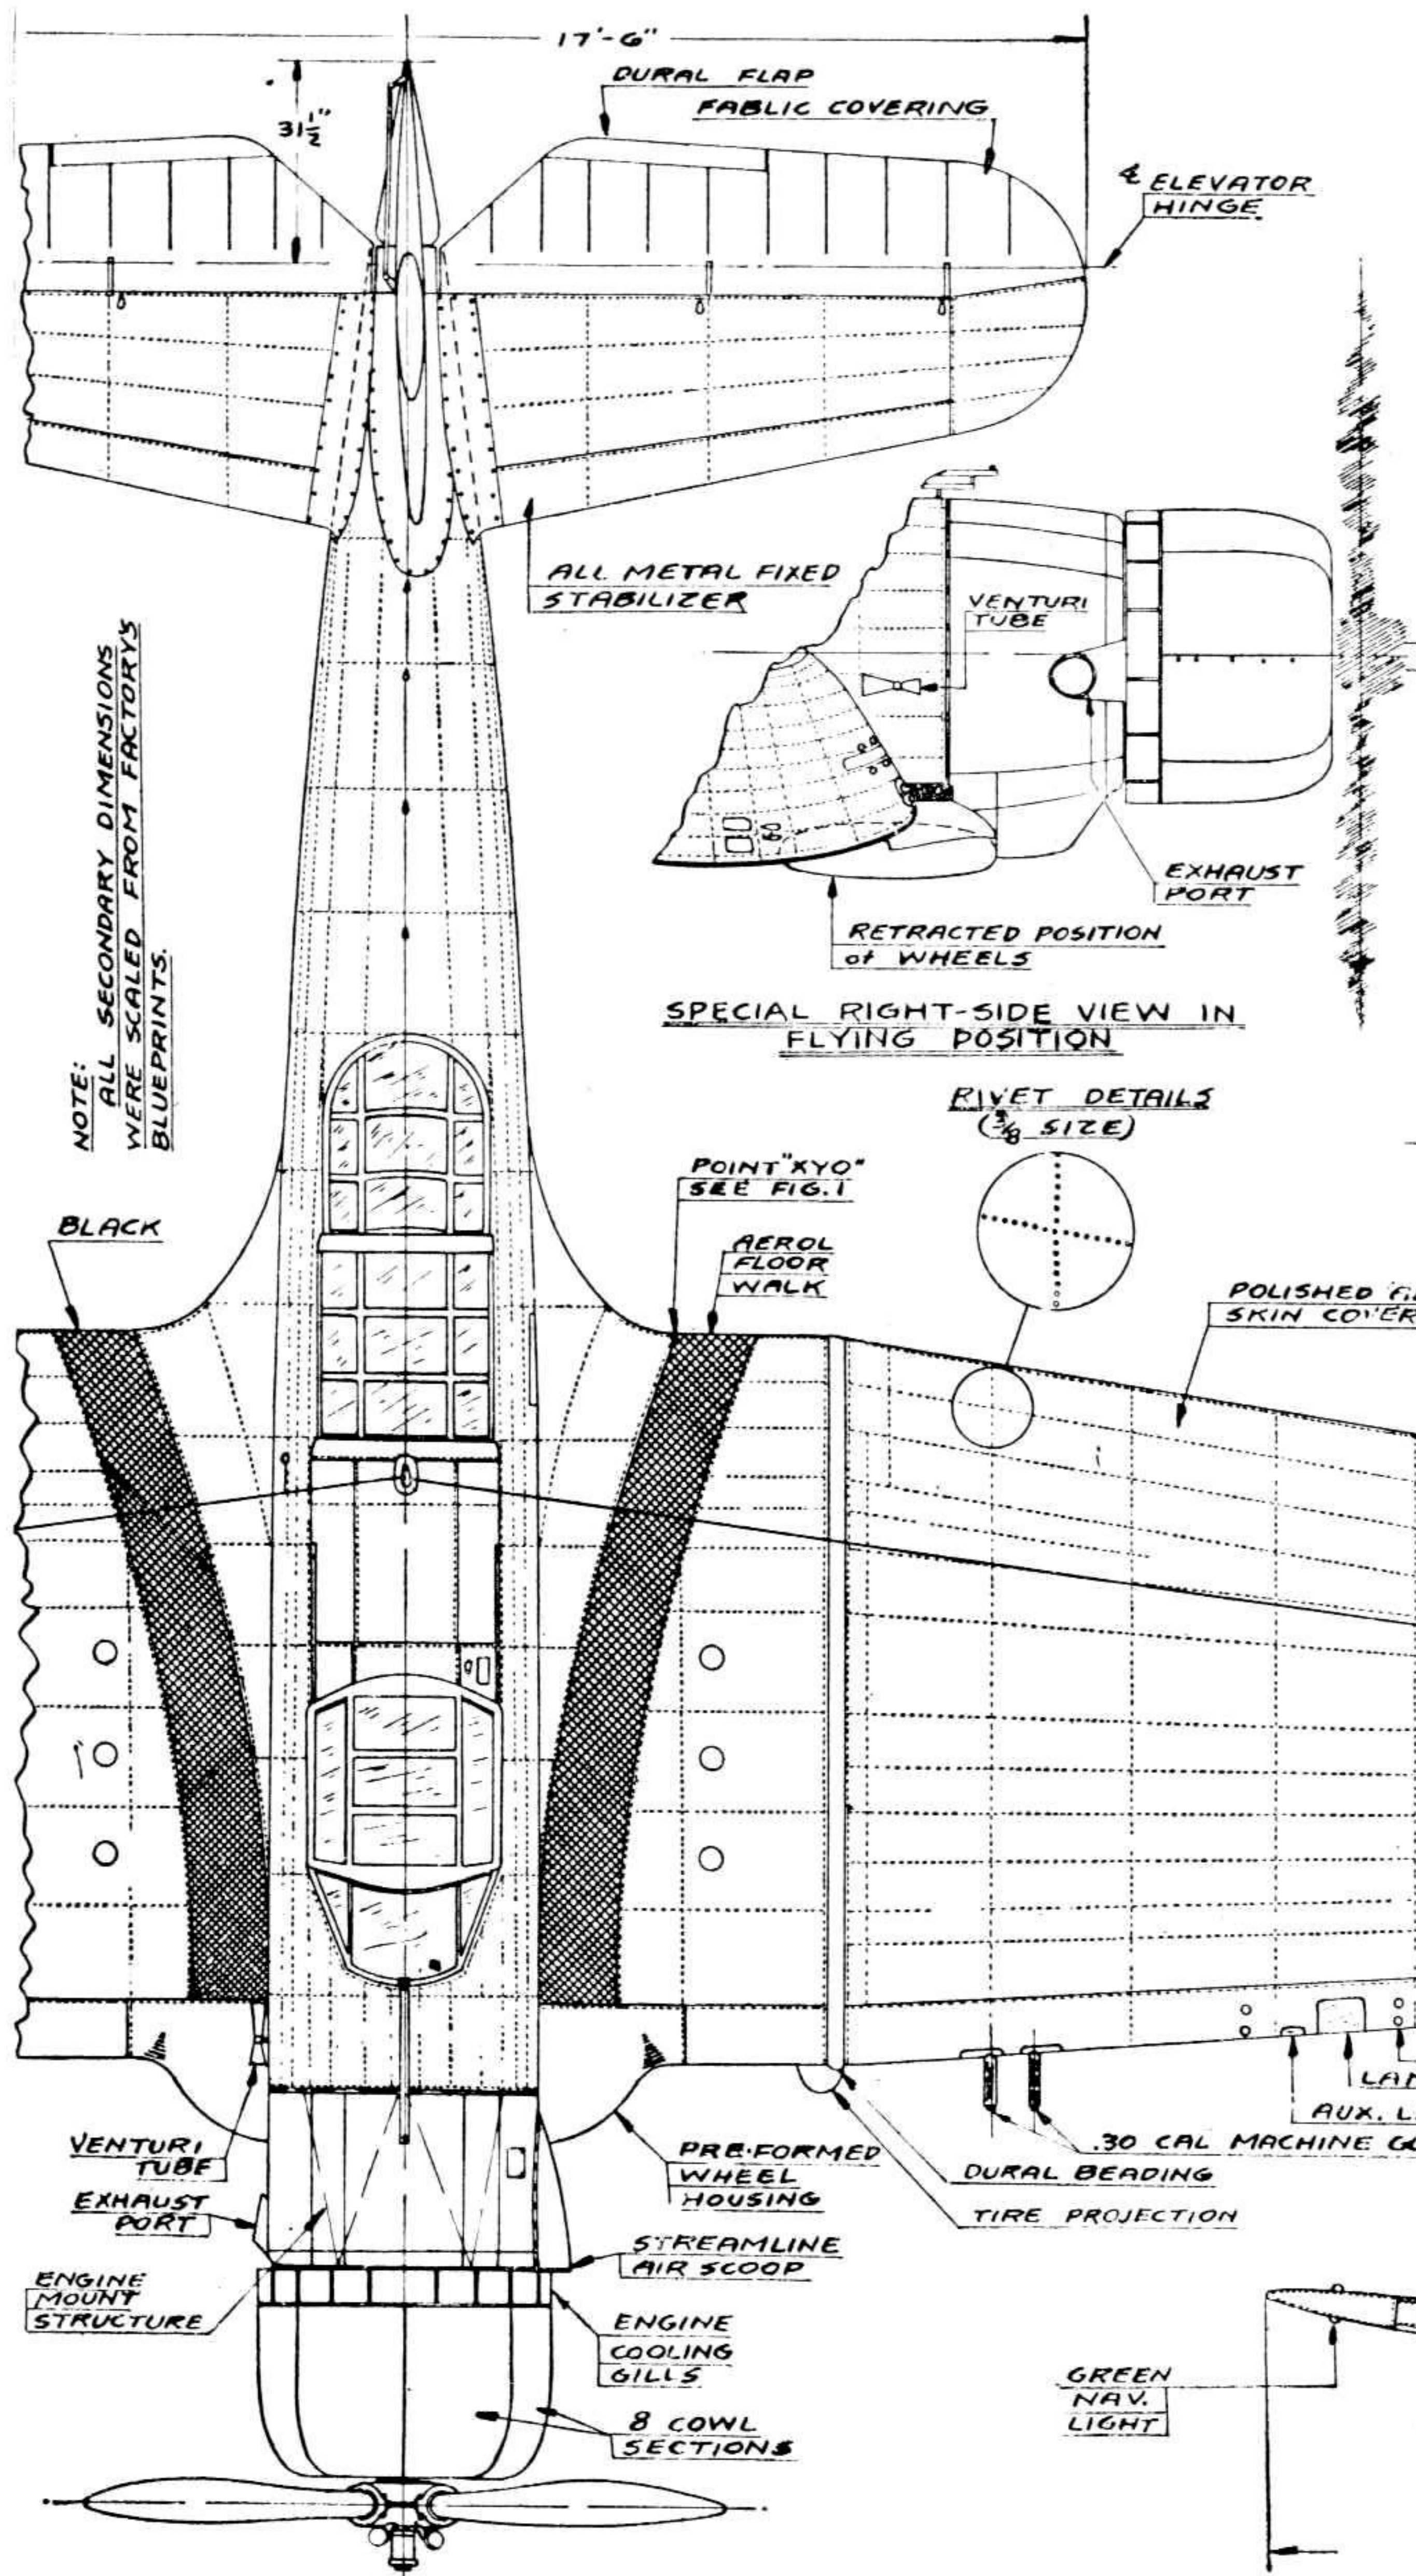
FINAL ASSEMBLY - TOP VIEW
